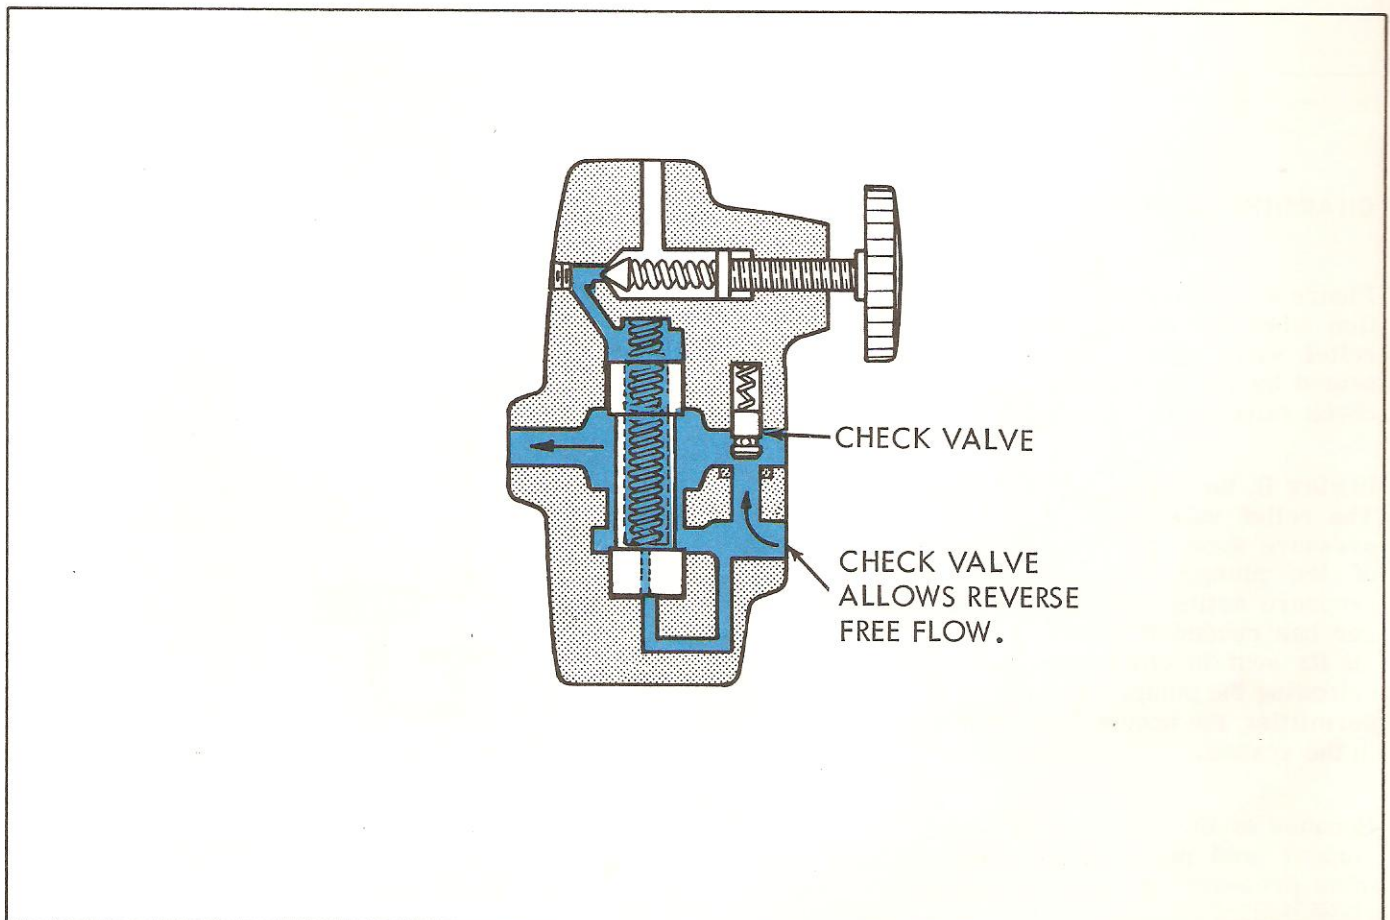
Pressure Reducing Valve with Internal Check Valve
